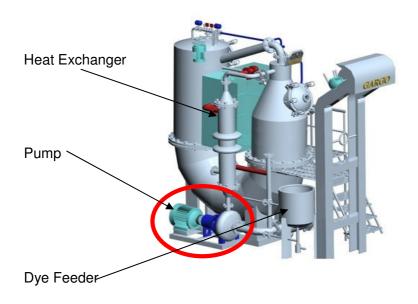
Sketch of Jet Dyeing Machine with location of pump
